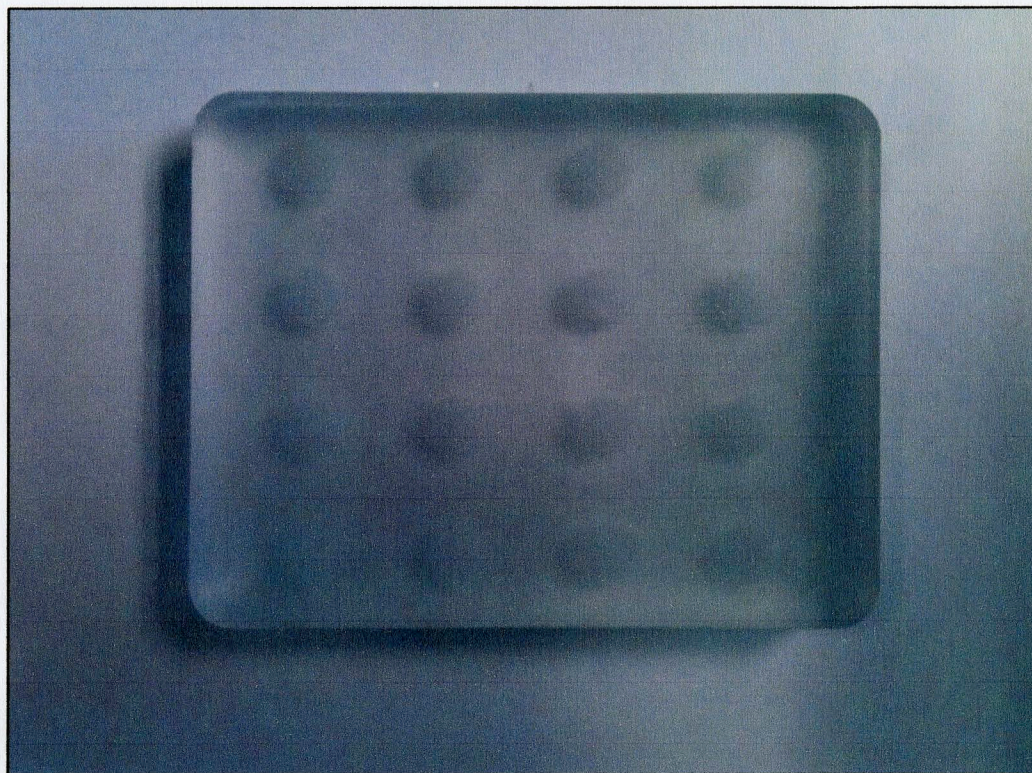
Polycarbonate mold used to form PMDS-valves. The composite is dispensed into the mold and covered with a top plate.
